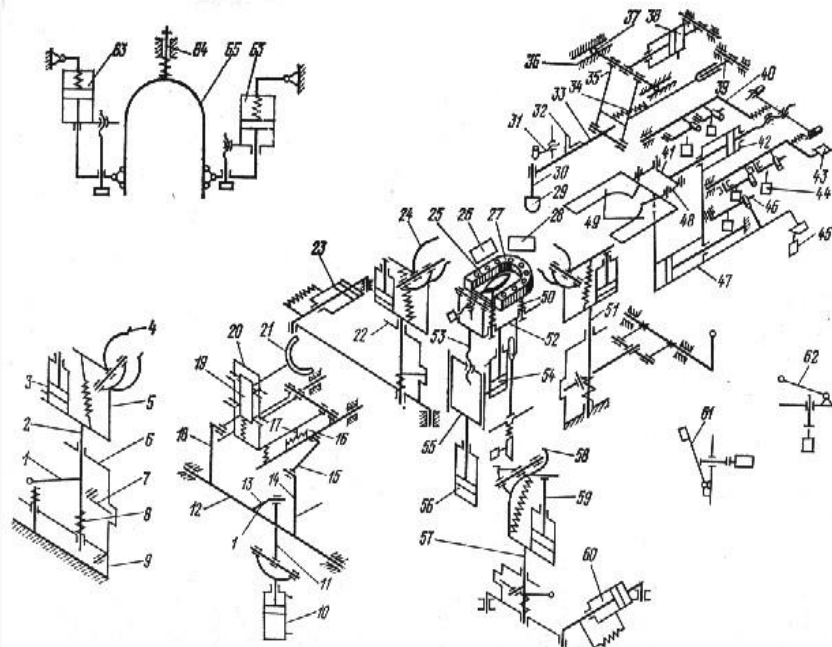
Kinematic diagram of the machine ZNK-2M-O
